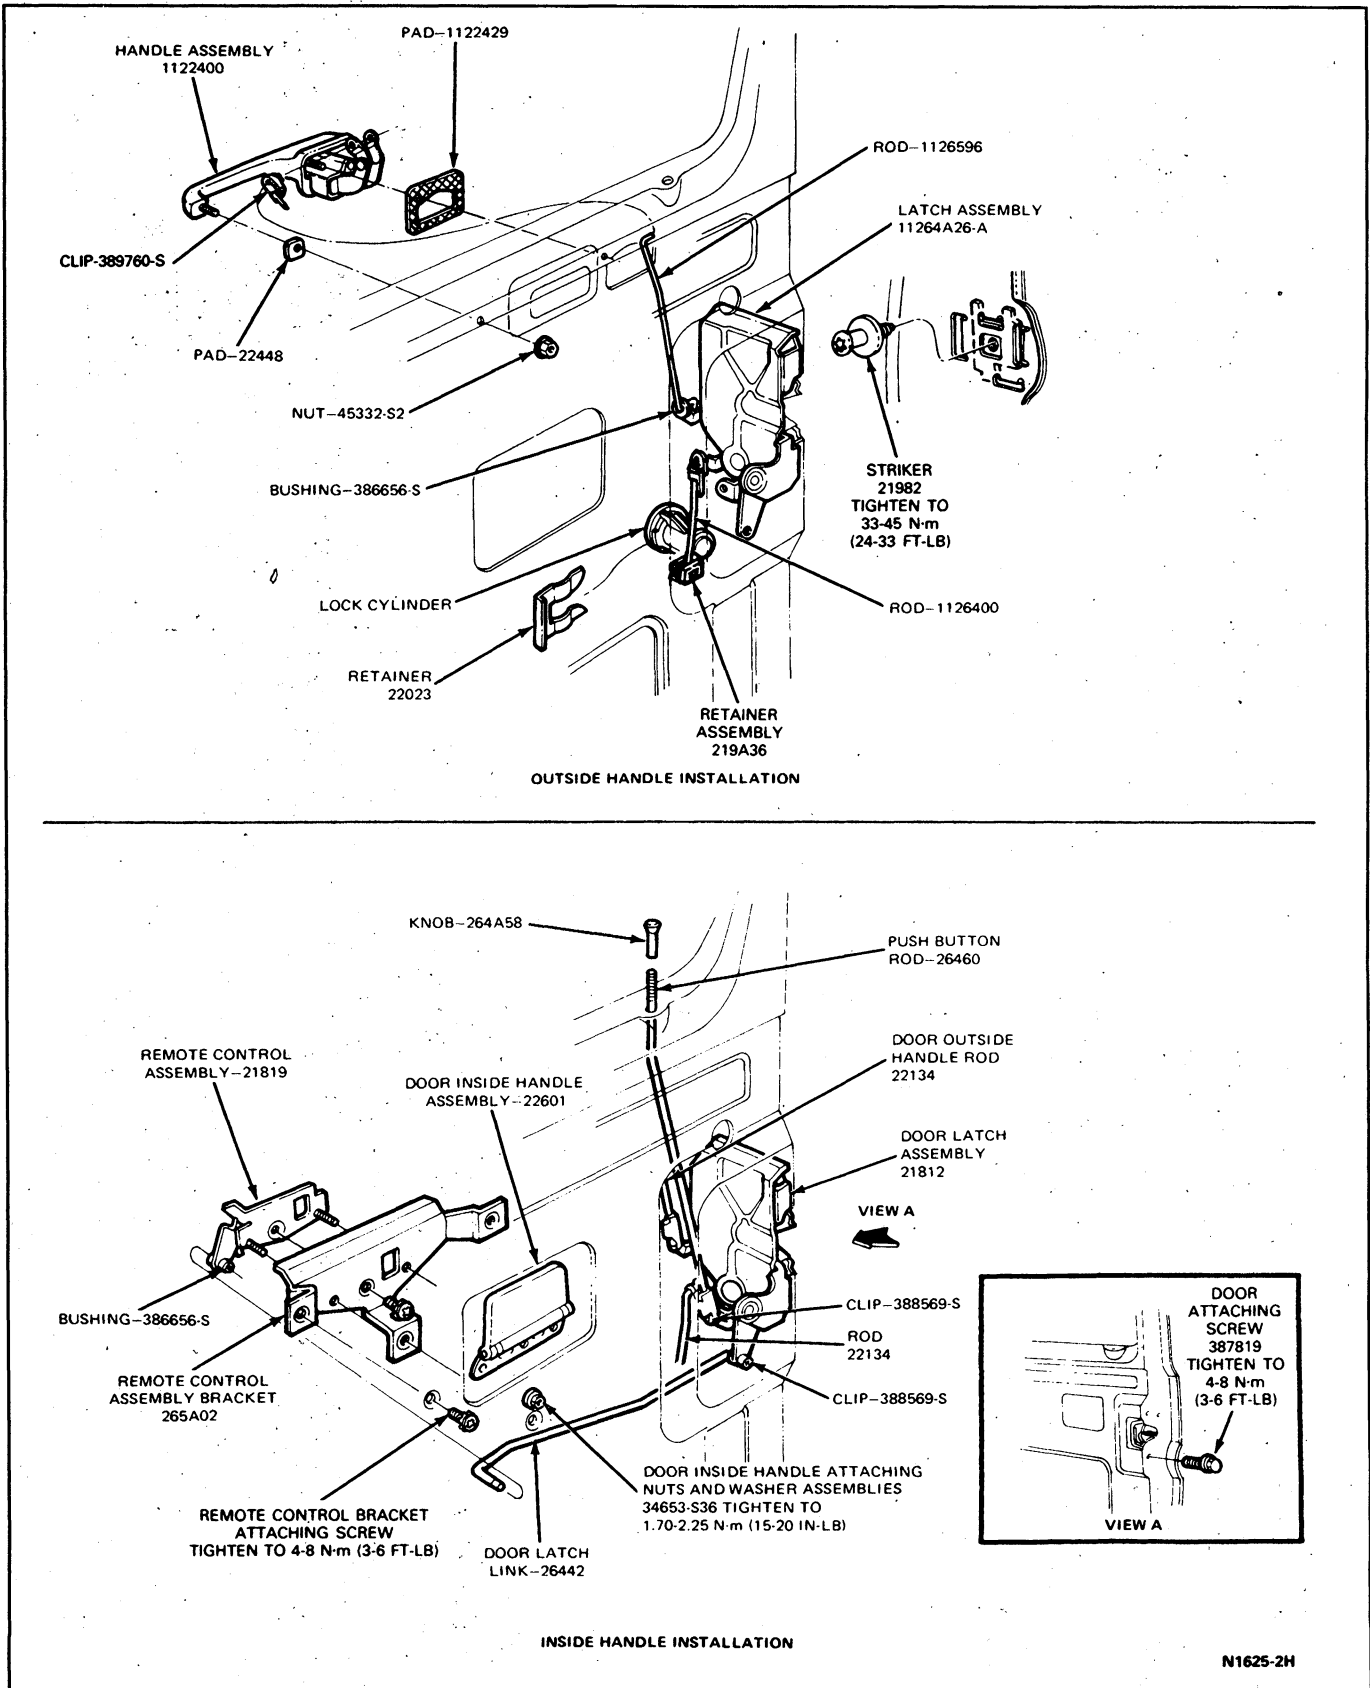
Front Side Cargo Door Latch Installation—E-150—E-350
